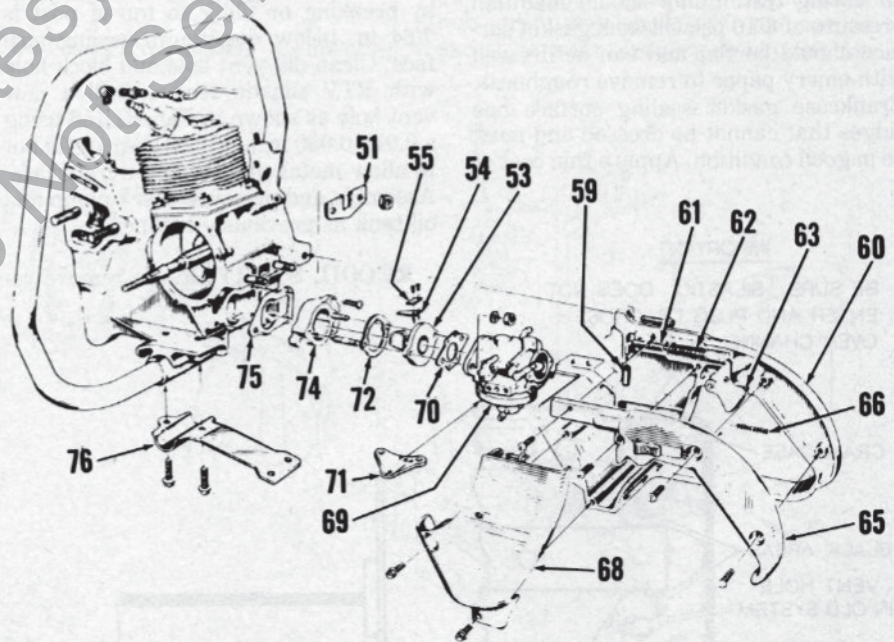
Exploded view showing typical throttle controls and carburetor mounting.
